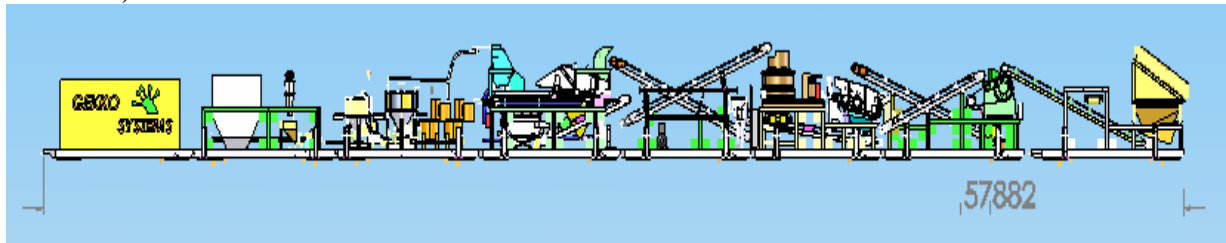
Underground Processing Plant from Feed Hopper to Tailings System
